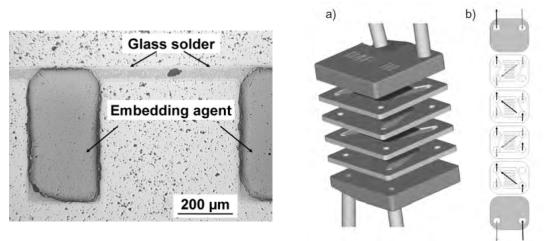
Channel plate assembly and cross-section showing the glass solder joining technique used by Alm *et al.* [183]
